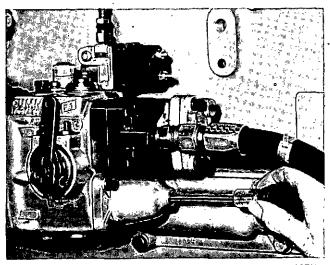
Setting idle speed — PT (Type G) fuel pump with automotive governor
